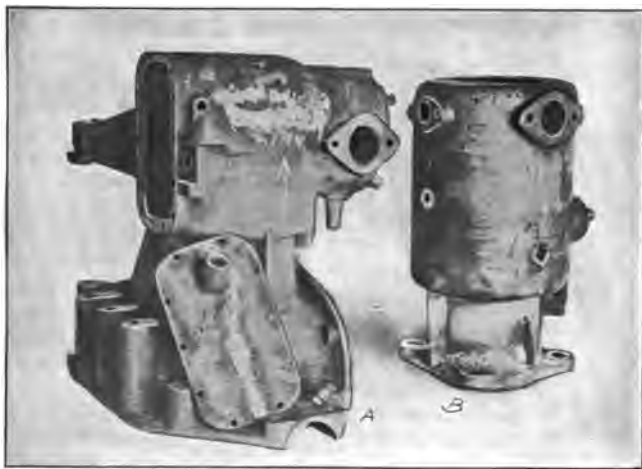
Cylinder A repaired by inserting a Steel Piece, bent to Shape, and autogenously welded in Place. Cylinder B has had Flange repaired
